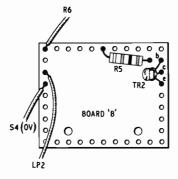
Assembly and wiring detail of pulse generator lamp amplifier (Board 'B'). Clad Veroboard is used for this with none of the copper strips cut
